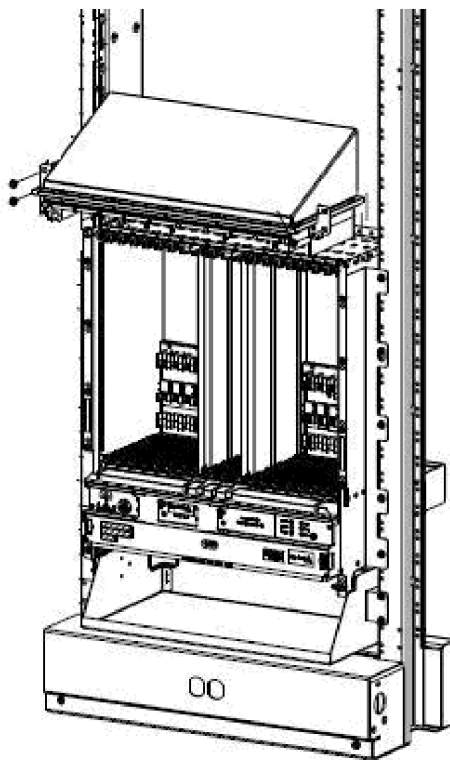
Pre-assembled 7360 ISAM FX-16 heat and fiber baffle kit
